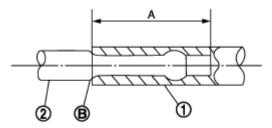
Identifying CVT Fluid Cooler Tube Courtesy of NISSAN MOTOR CO., U.S.A.
